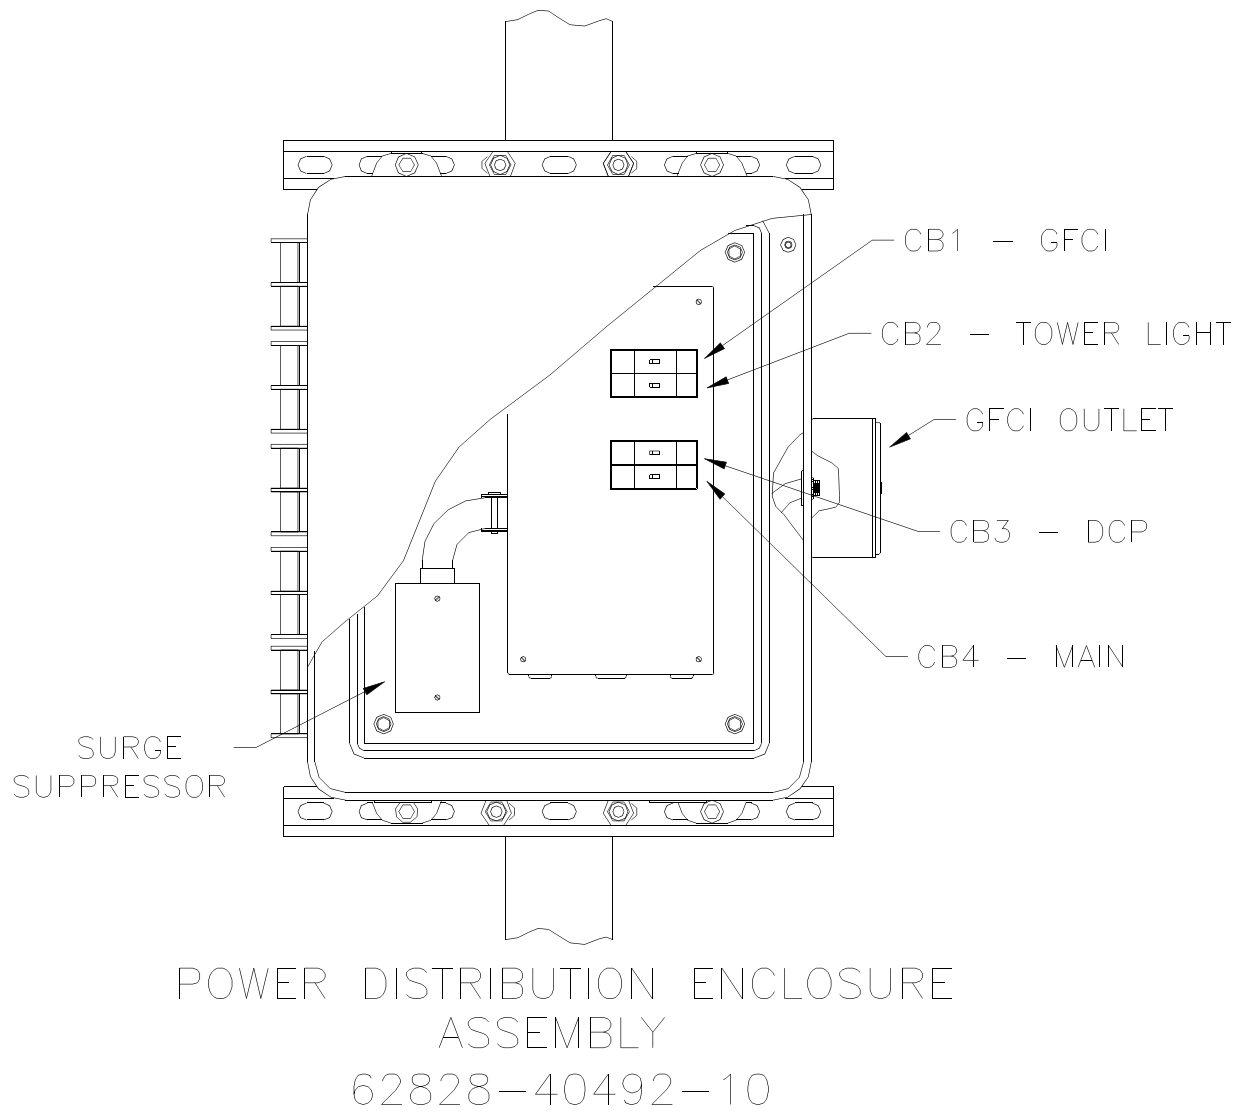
Typical AC Junction Box (Sheet 1 of 2)
